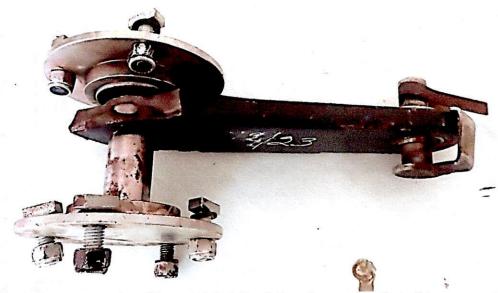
Photograph showing of fractured Bell Crank lever in as received condition.
